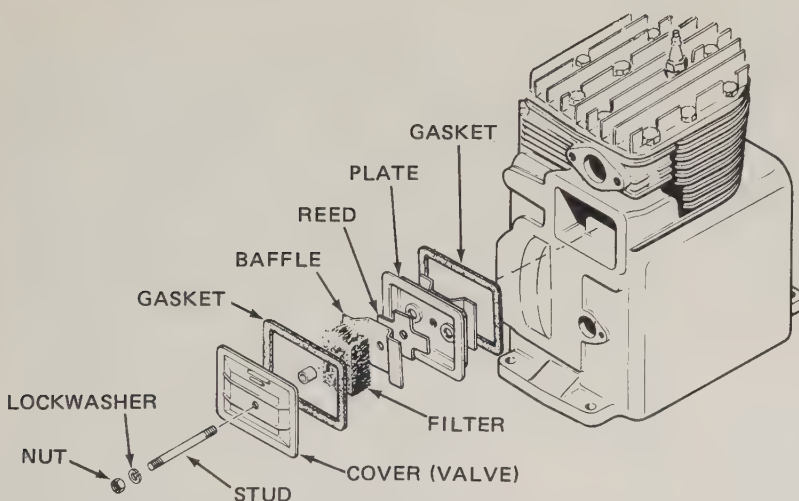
Disassembled view of a crankcase breather for a small four-cycle engine.
